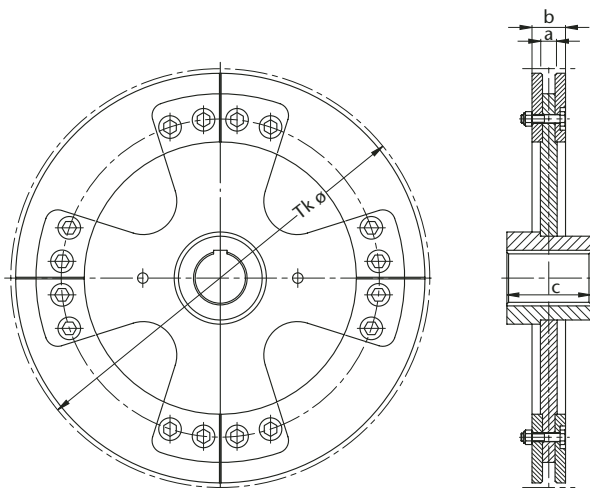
Toothless chain wheel with replaceable steel rim segments type RUR
